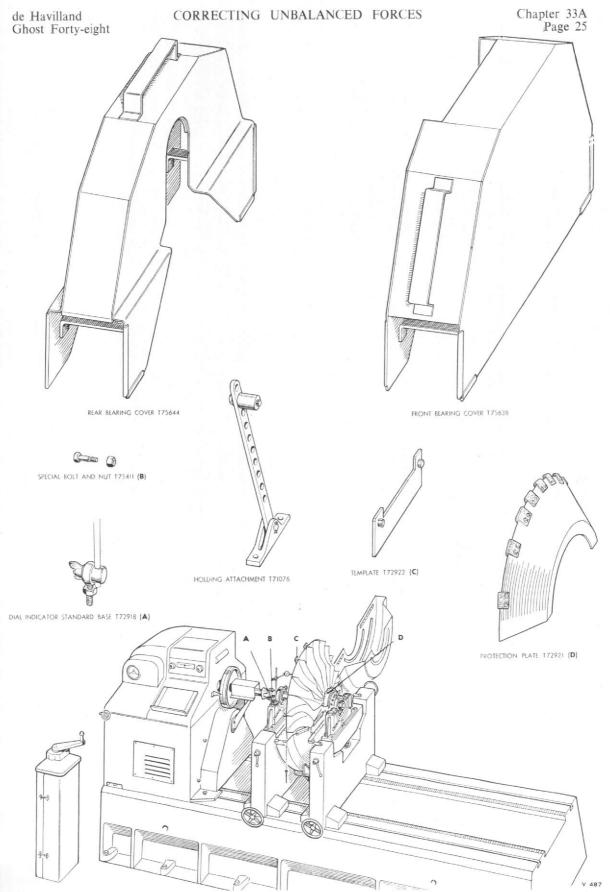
Impeller in Avery type 7208 balancing machine; showing tools used when correcting unbalanced forces.
